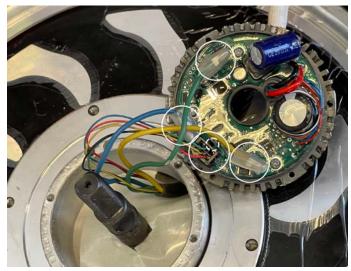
Removed controller card with wire connectors shown. Lock-ing pin marked by dotted circle.
